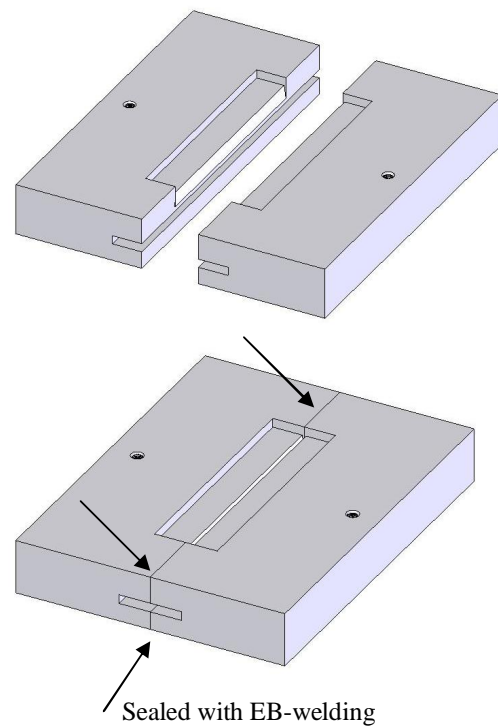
Test piece used in hot cracking tests. Two machined halves are put together and sealed using electron beam welding into the one test piece.
